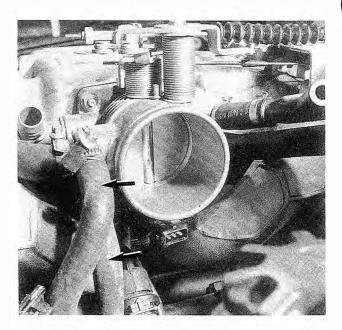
Coolant hoses to be removed from throttle housing (arrows).
